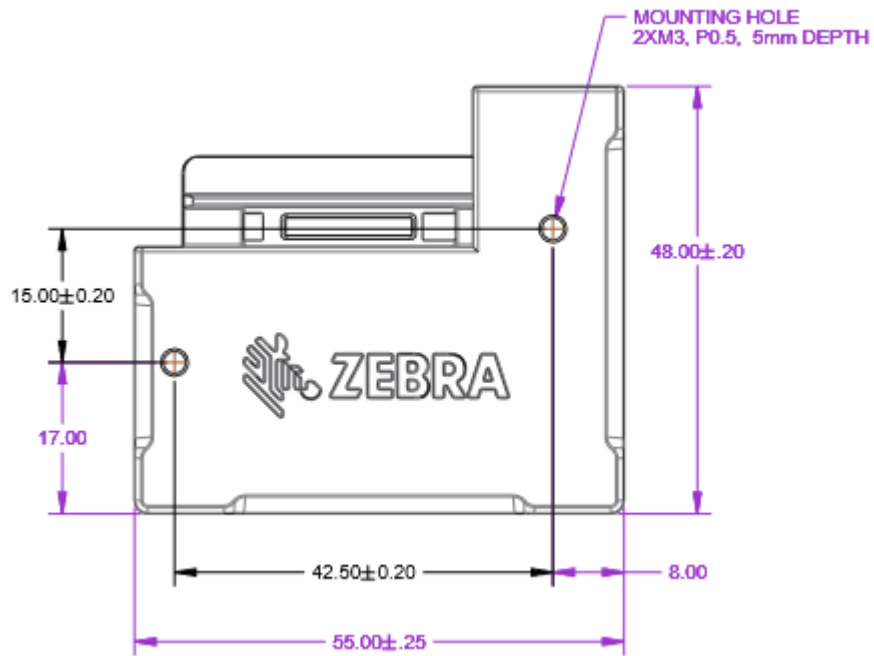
MS4717 Mounting Dimensions (Right Side View)
